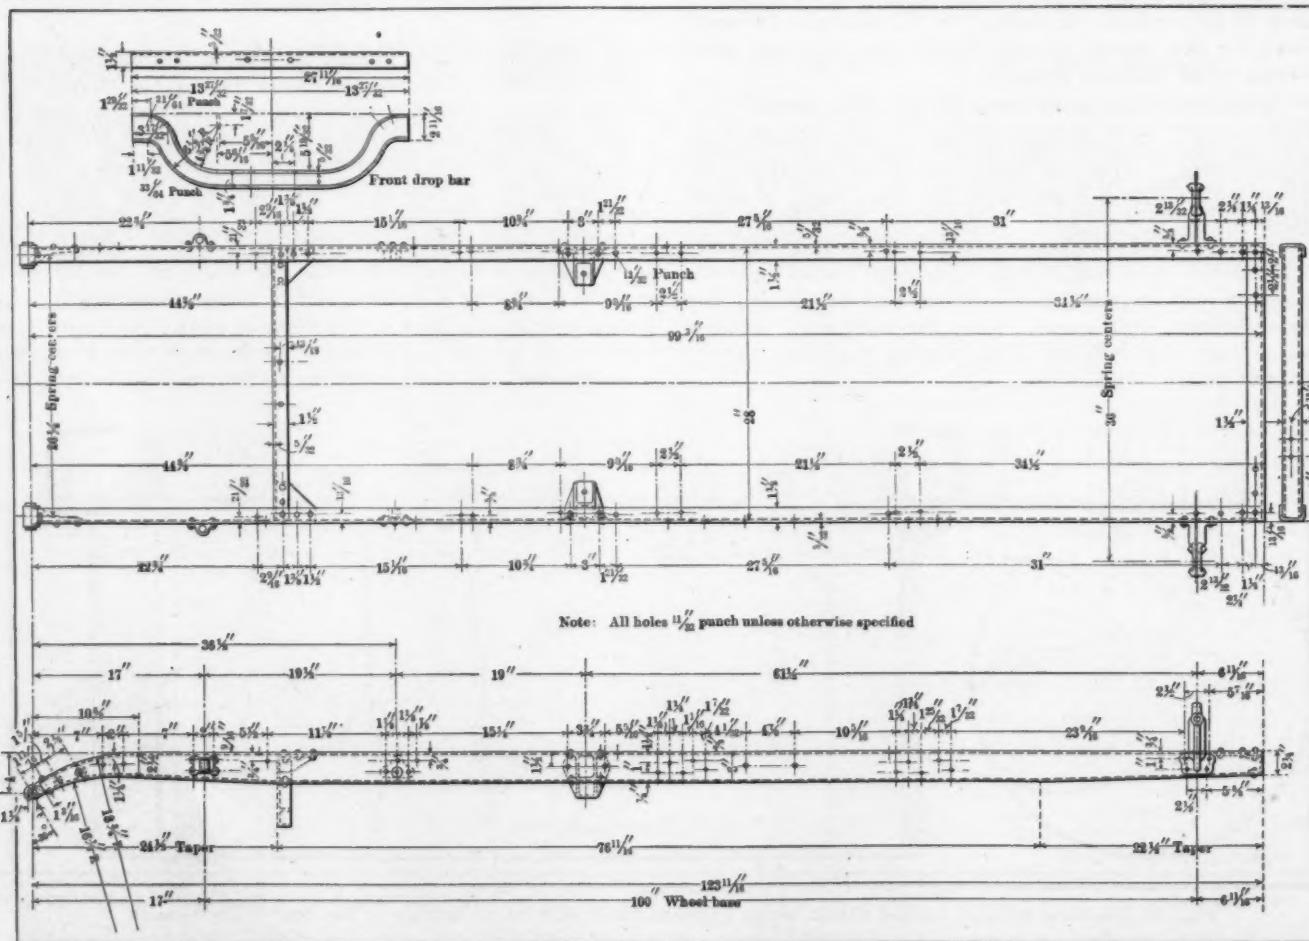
Metzger frame, plan and elevation, with straight front and rear, and hangers for full elliptic rear springs
